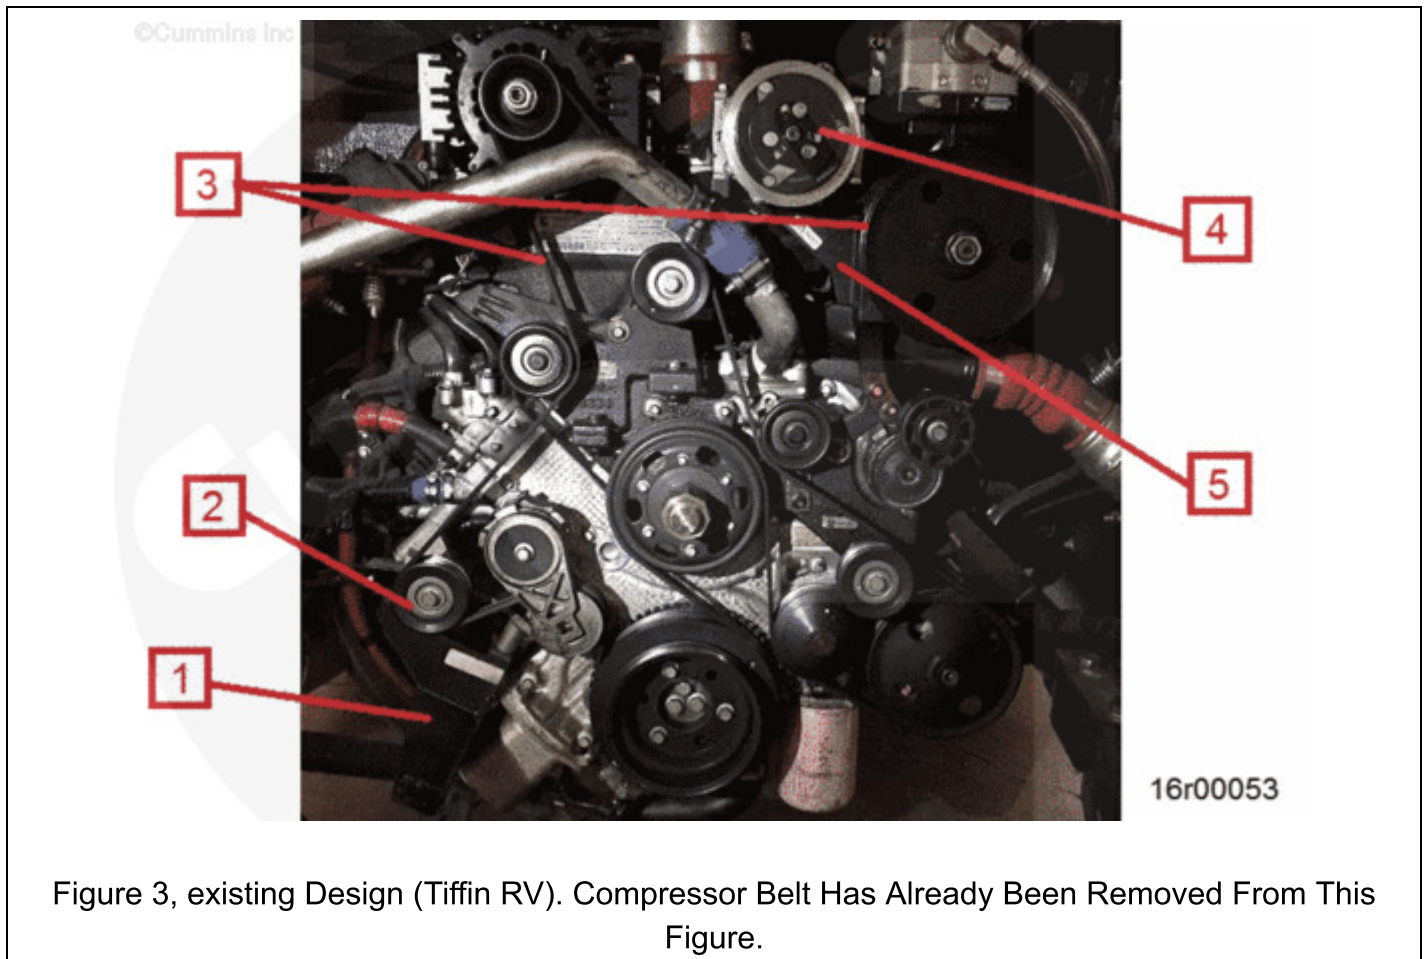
, existing Design (Tiffin RV). Compressor Belt Has Already Been Removed From This Figure.
